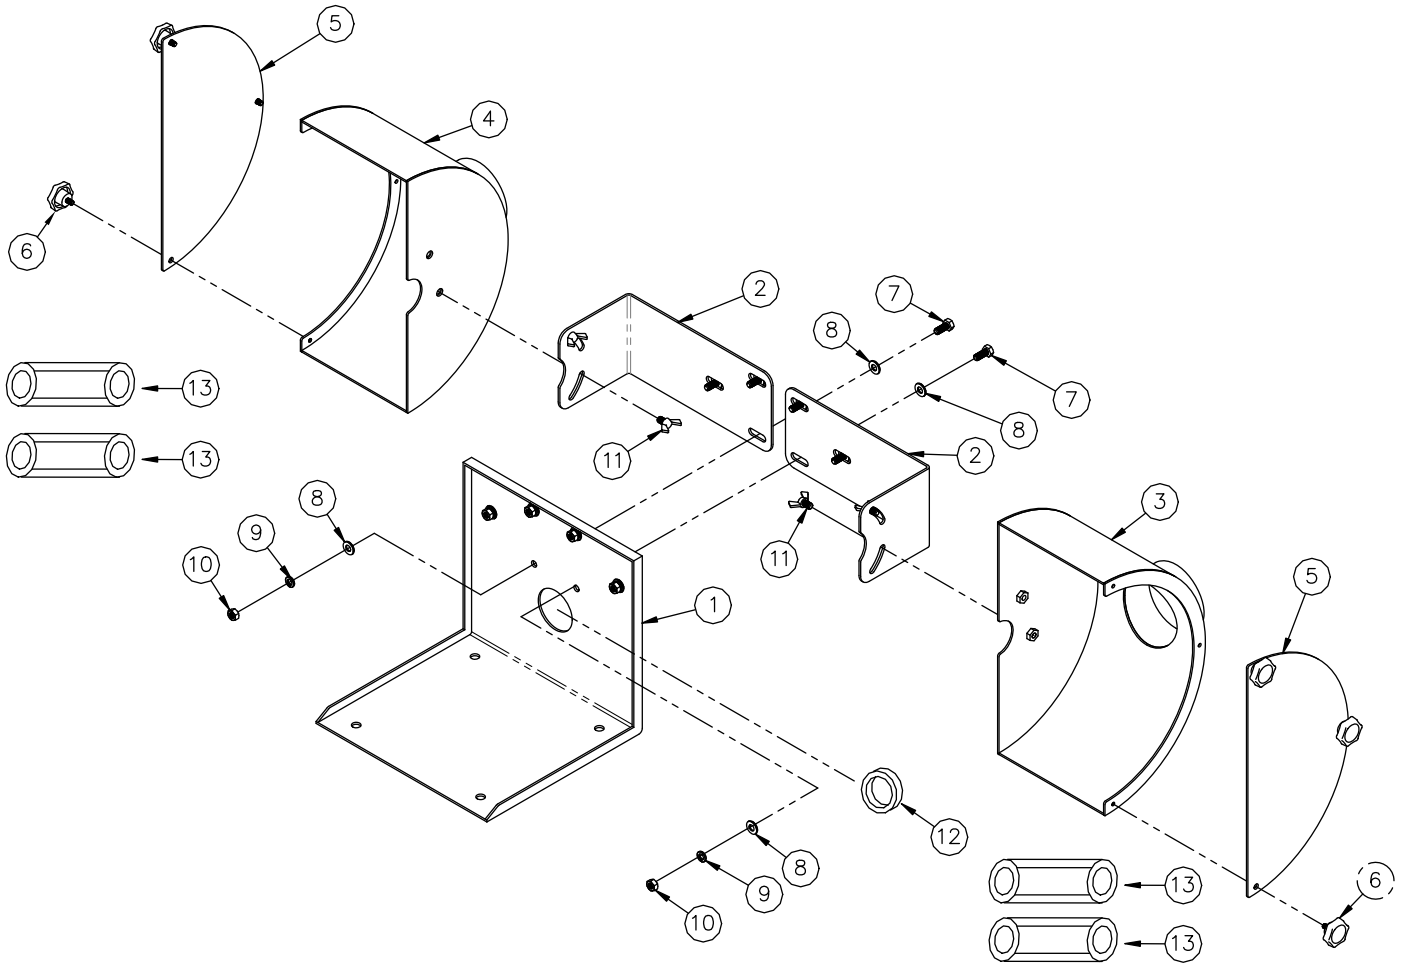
Replacement parts illustration for Buffer Wheel Dust Shroud.
